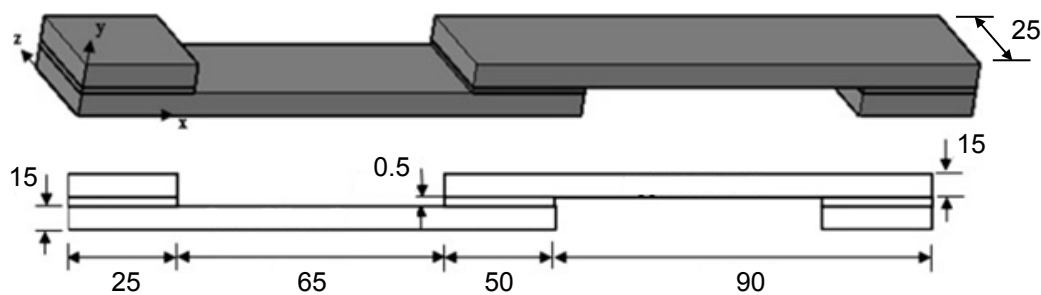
Specimen geometry for single lap-shear adhesive joint
